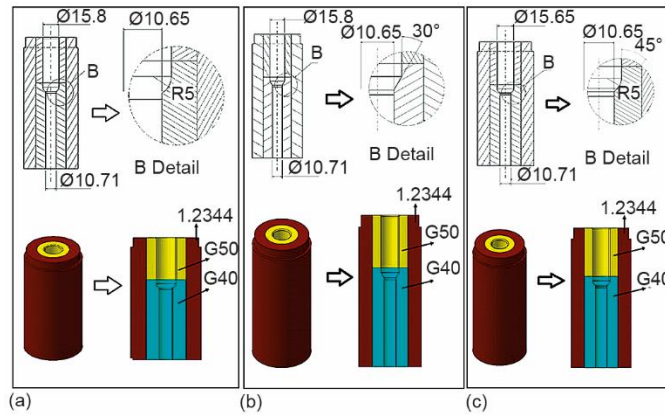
Drawings and solid models of dies; (a) radius extrusion die, (b) angle extrusion die, and (c) radius-angle extrusion die
